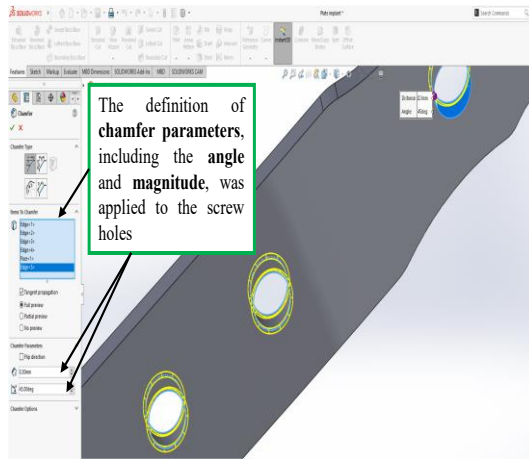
Chamfer operation for small-sized screw holes on the plate implant
